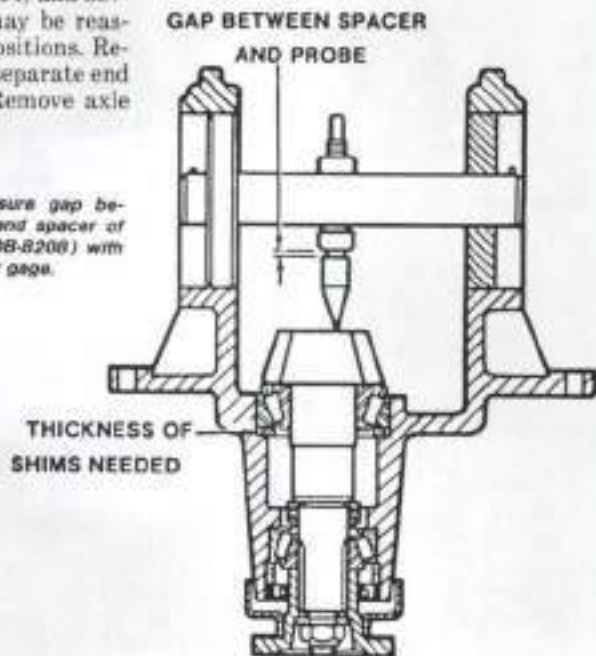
To set pinion shaft protrusion, install special tool set (DB-8208) in carrier housing as shown. Refer to Fig. 13 and to text to determine thickness of shims required to correctly set shaft protrusion.
